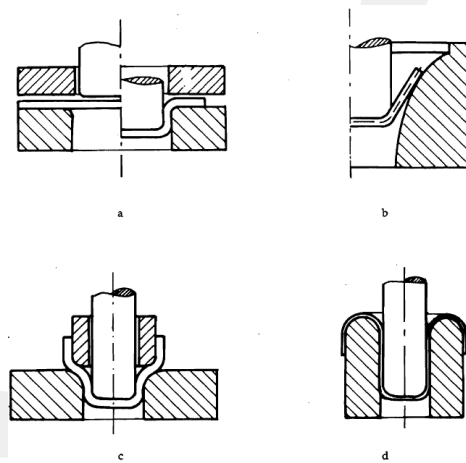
Schematic representations of some axisymmetric deep drawing processes, a) Deep drawing with a blankholder b) Deep drawing without a blankholder c) Direct redrawing d) Reverse redrawing, [42].
